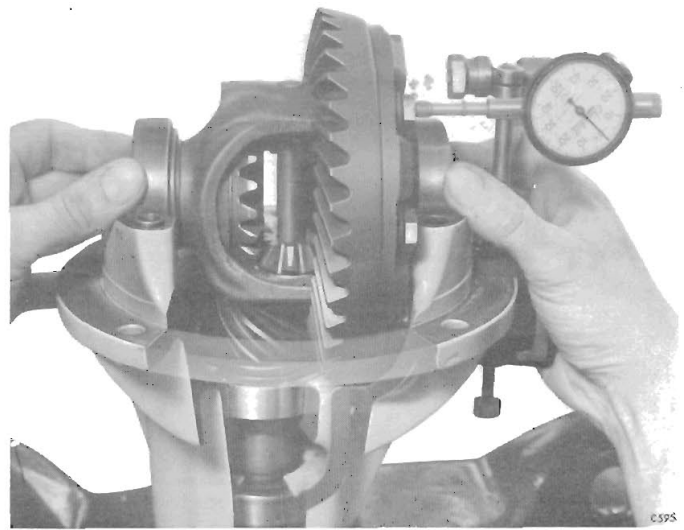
Using a dial gauge to measure “in and out” of mesh
